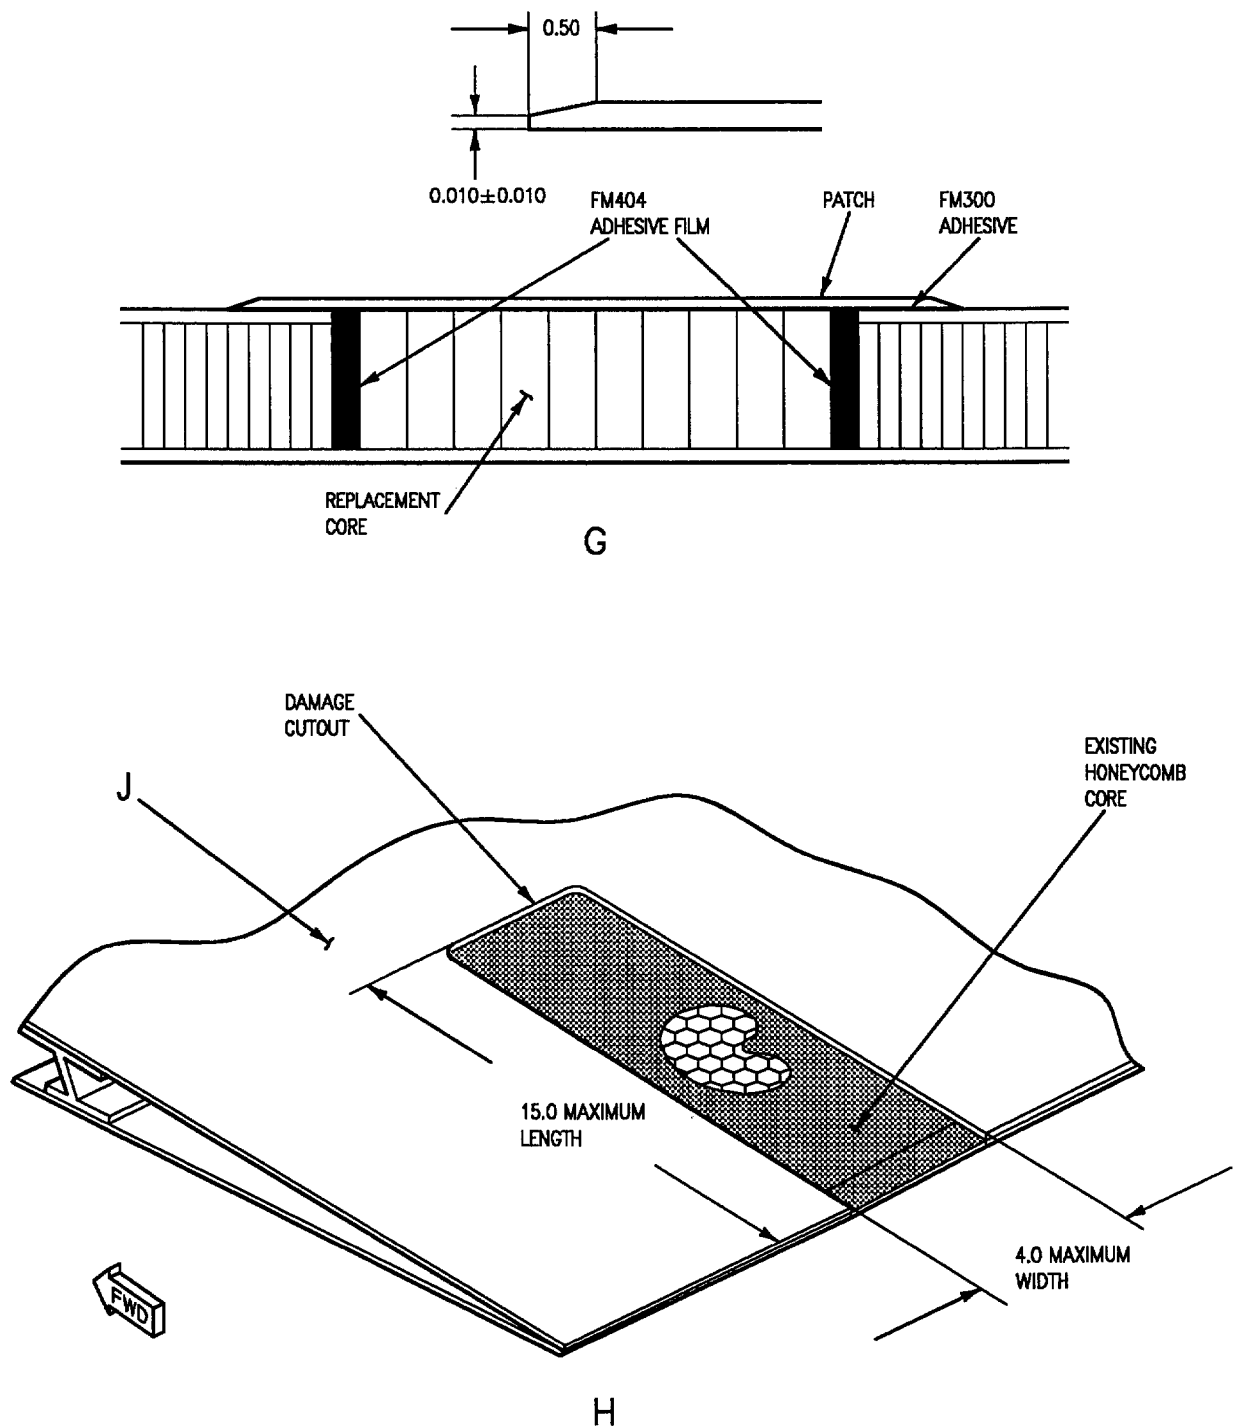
Outboard Trailing Edge Damage Repair (Sheet 5)
